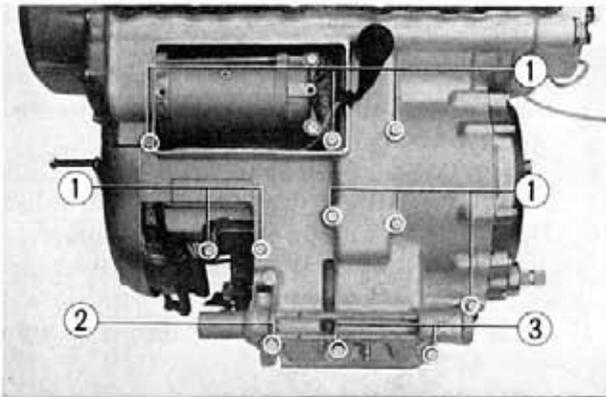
① 6mm bolts ② 10mm bolt ③ 8mm bolts
